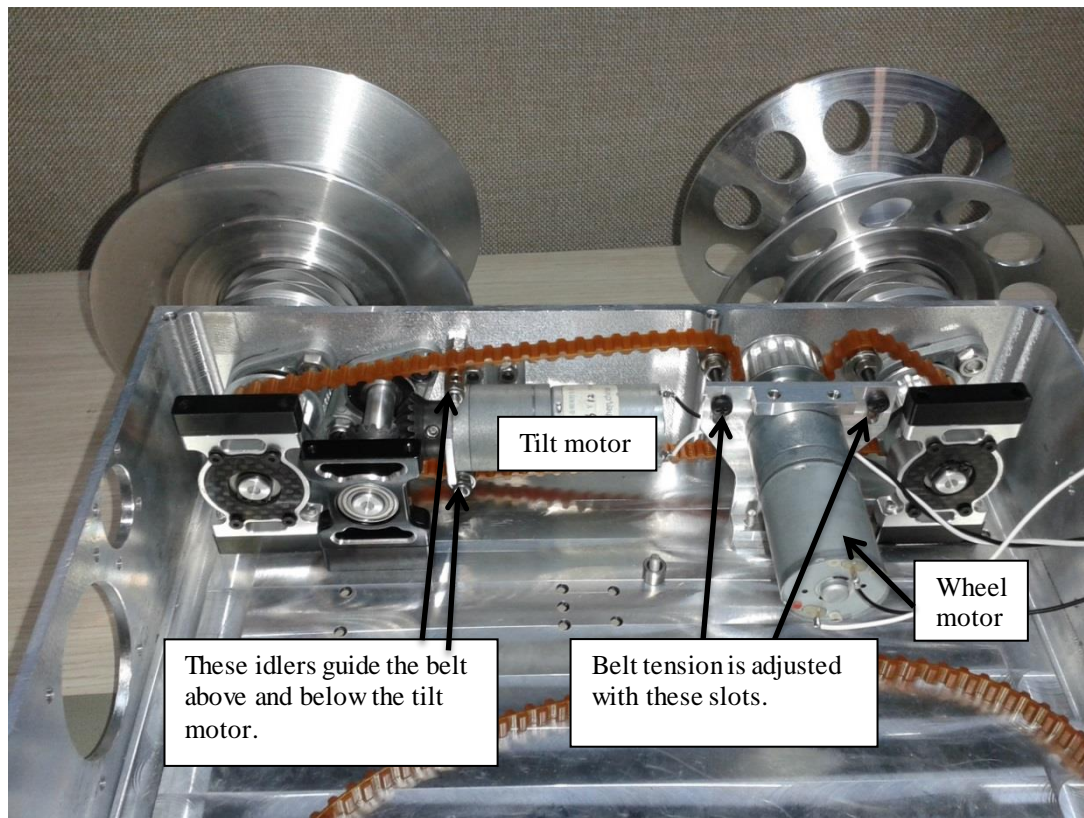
Locomotion System of the Robot, Showing the wheels, bearings, belt and pulleys. Wheel taken from the “dumbbell” is left wheel in the picture.
